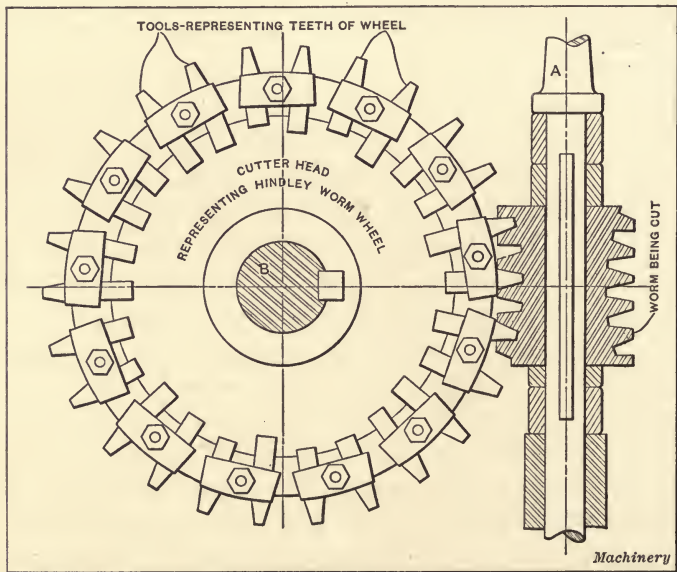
Method of Cutting Hindley Worm with Rotary Cutter having Teeth Corresponding with Those of the Wheel
